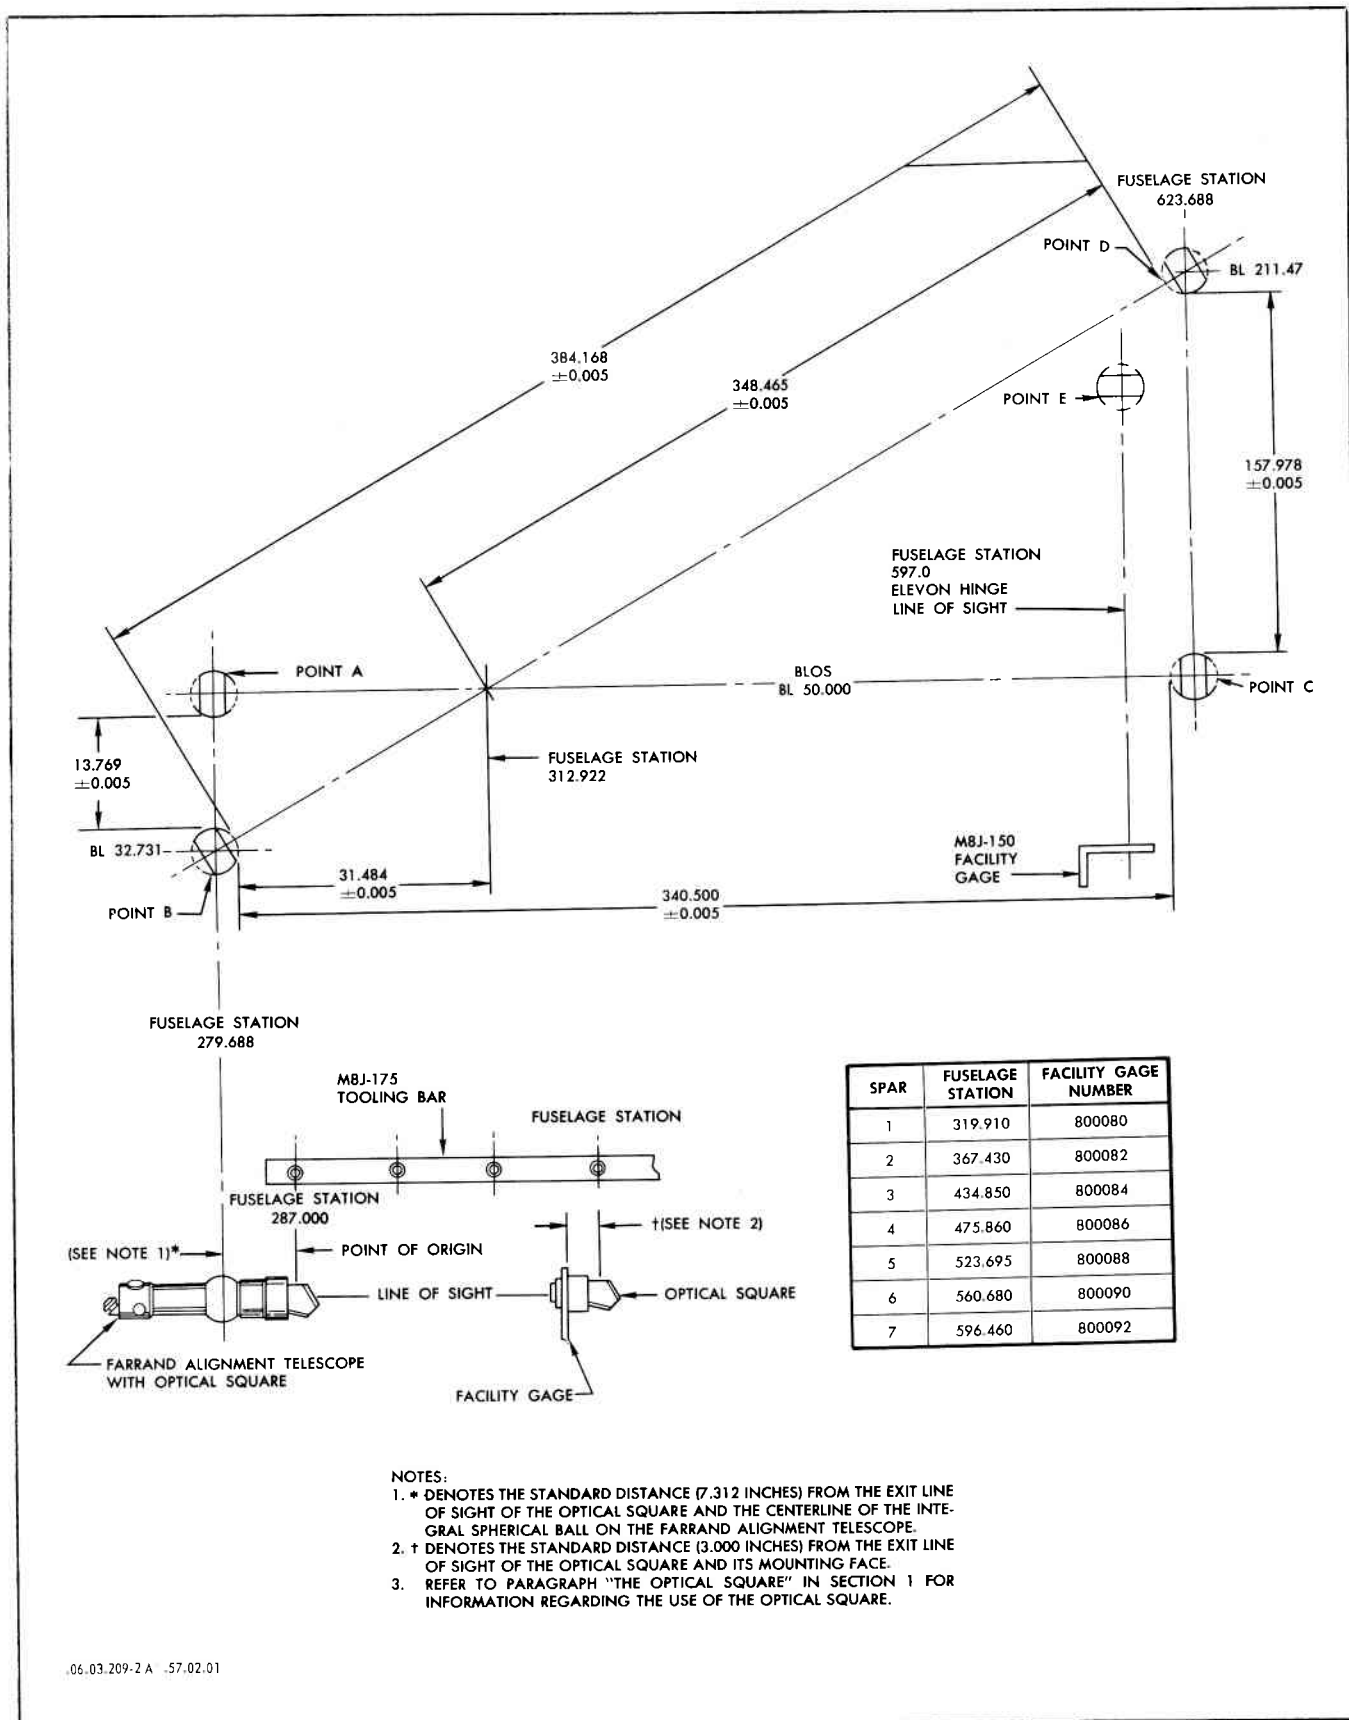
Master Tooling — Case XXIX Wing Assembly (Sheet 2 of 2)
